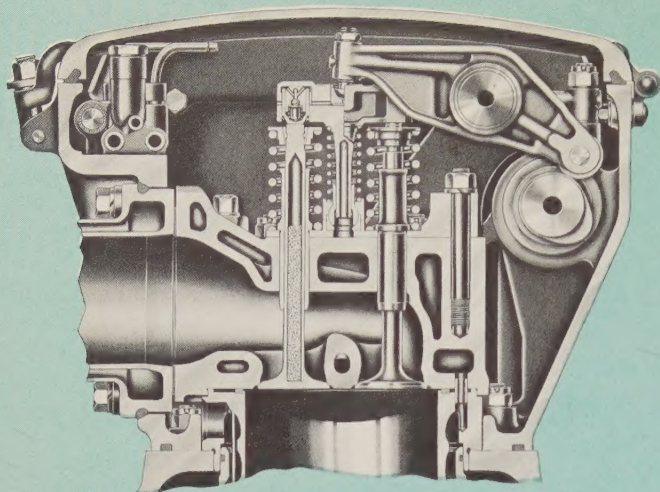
Cross-sectional view through the cylinder head and exhaust valves.
